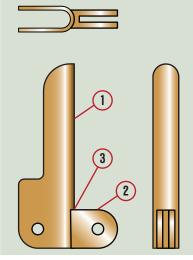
Handle grip subassembly, twice size. 1 — Handle grip; 2 — Grip extension; 3 — soft solder 1 and 2 together.
